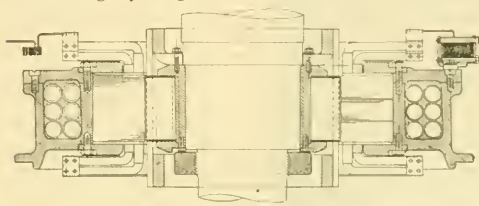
CROSS SECTION OF SPINNING MOTOR
